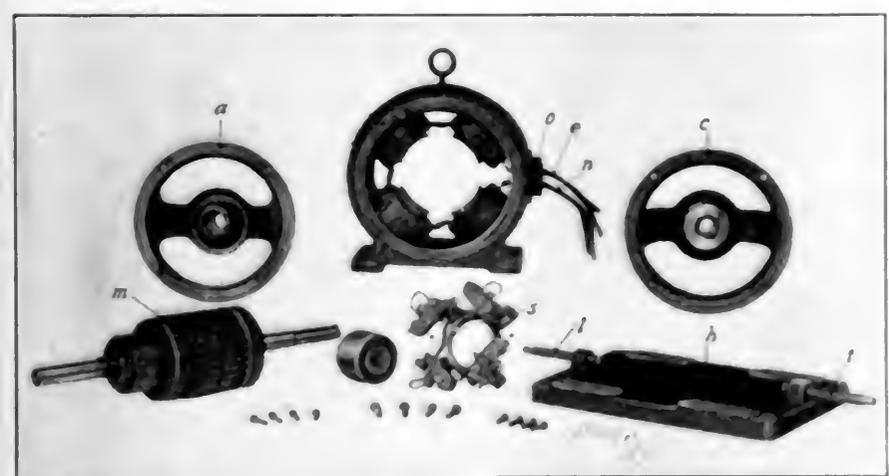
PARTS OF THE MULTIPOLAR GENERATOR SHOWN IN FIG. 292
